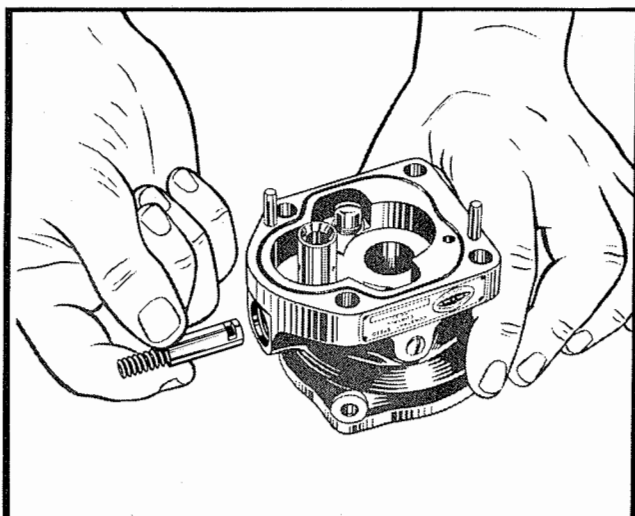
Inserting Relief Valve Plunger and Spring into Governor Body
